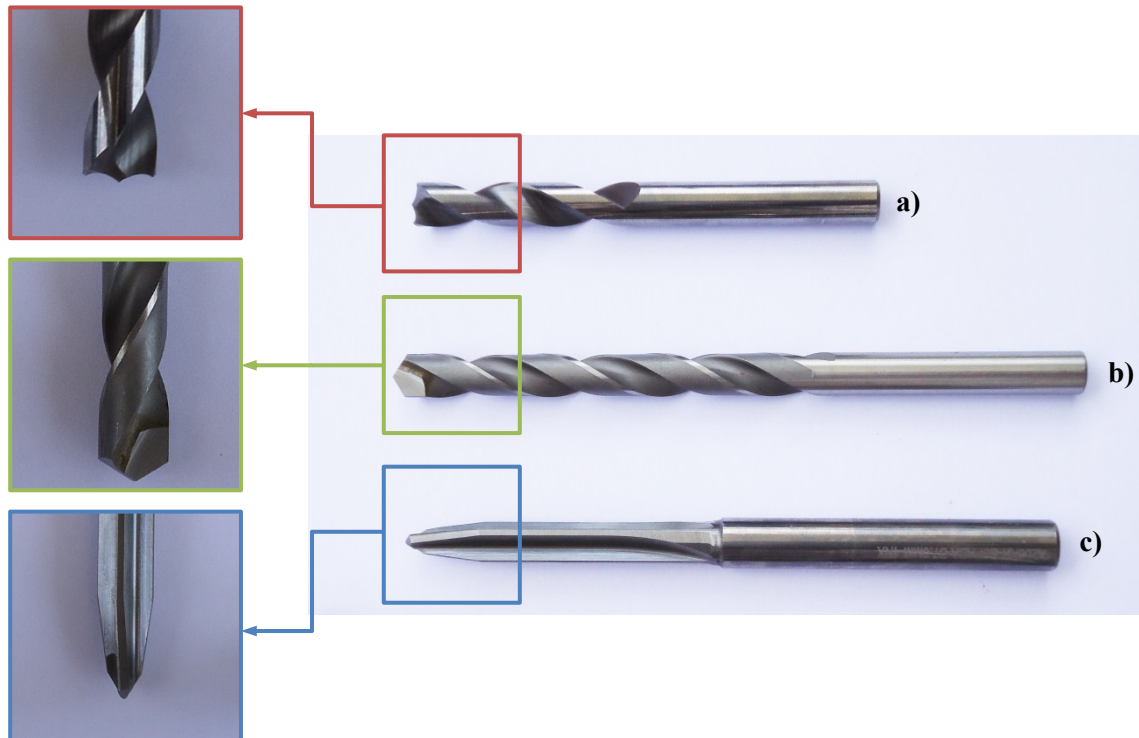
Tool geometries used on experimental work: a) W-shape drill; b) Twist drill;
